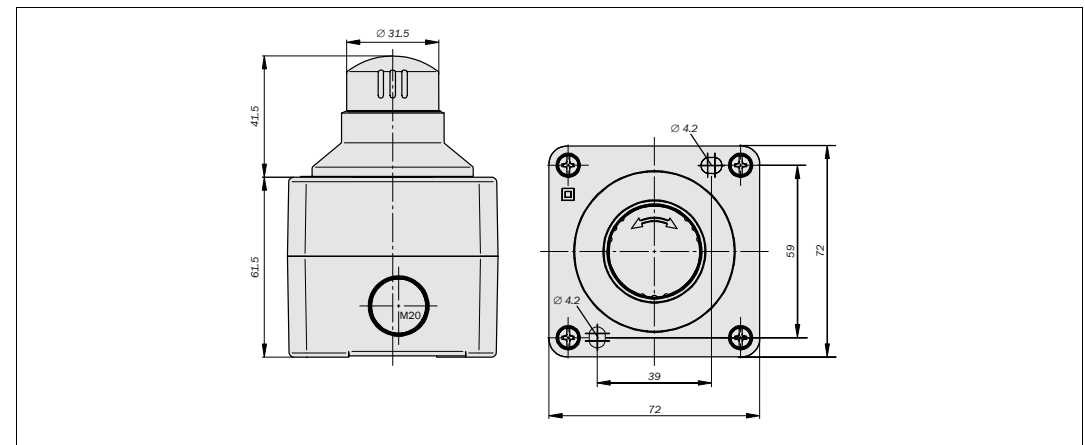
Dimensional drawing for the surface-mounted version (mm)
